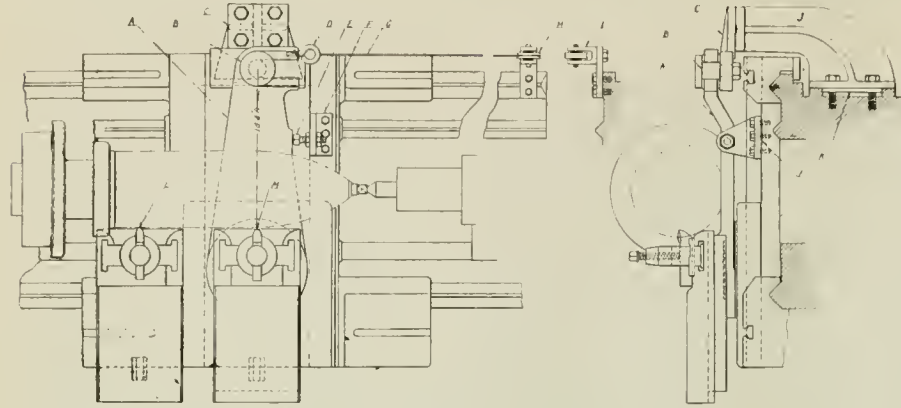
LAYOUT OF FINISH TURNING DEVICE.
